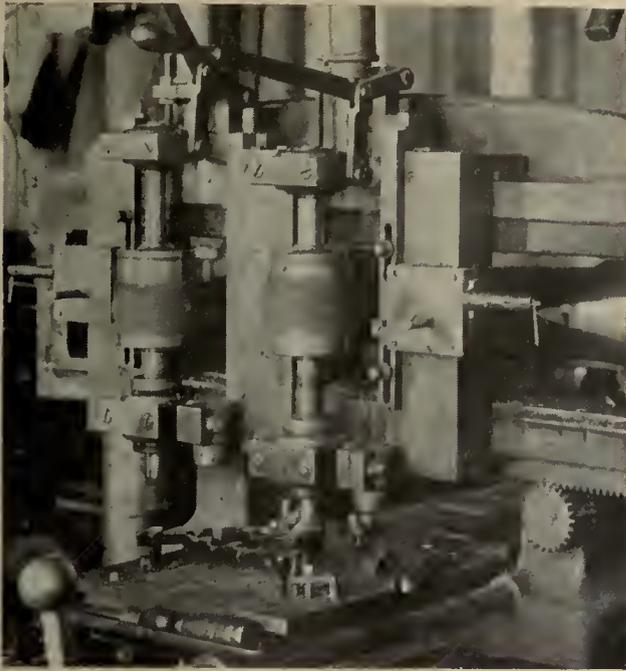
PROFILING MACHINE MILLING TYPEWRITER FRAMES
